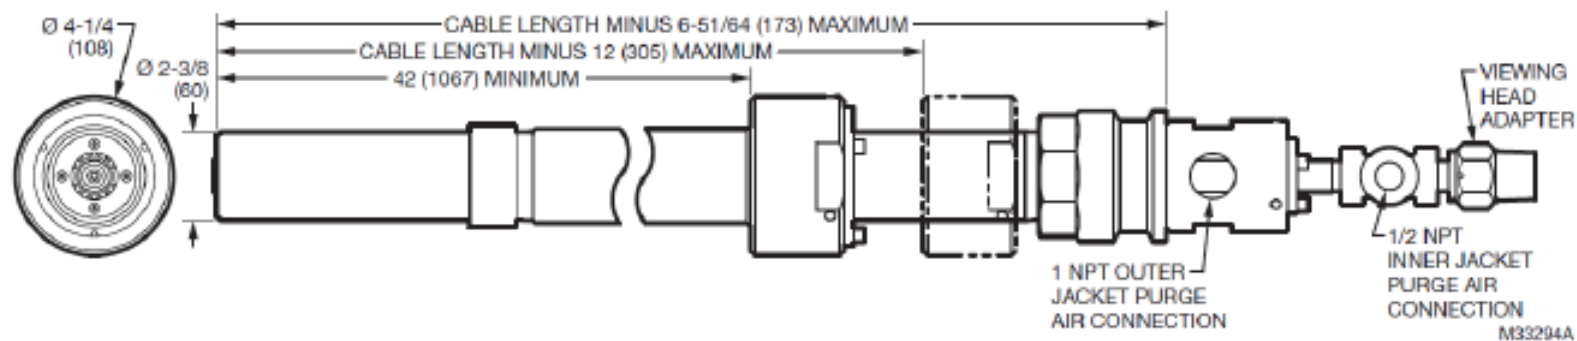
Outer carrier assembly example (dimensions in in. [mm]).
